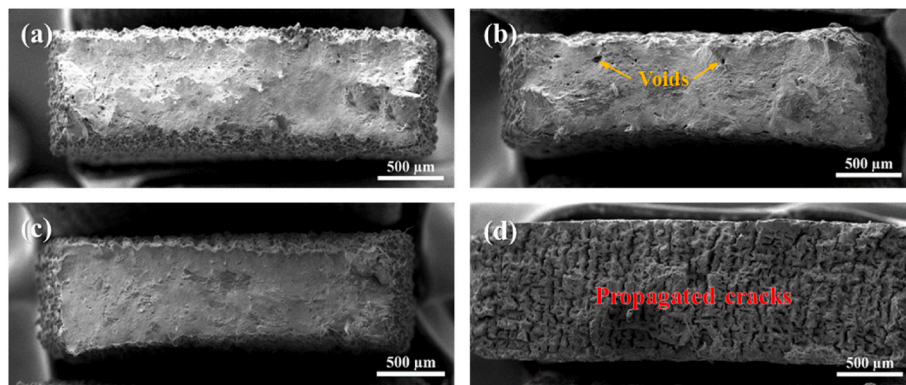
Fracture surfaces of the FGM.Opt tensile samples in macro-scale: a) F0, F50SS, c) F50IN, and d) F25.
